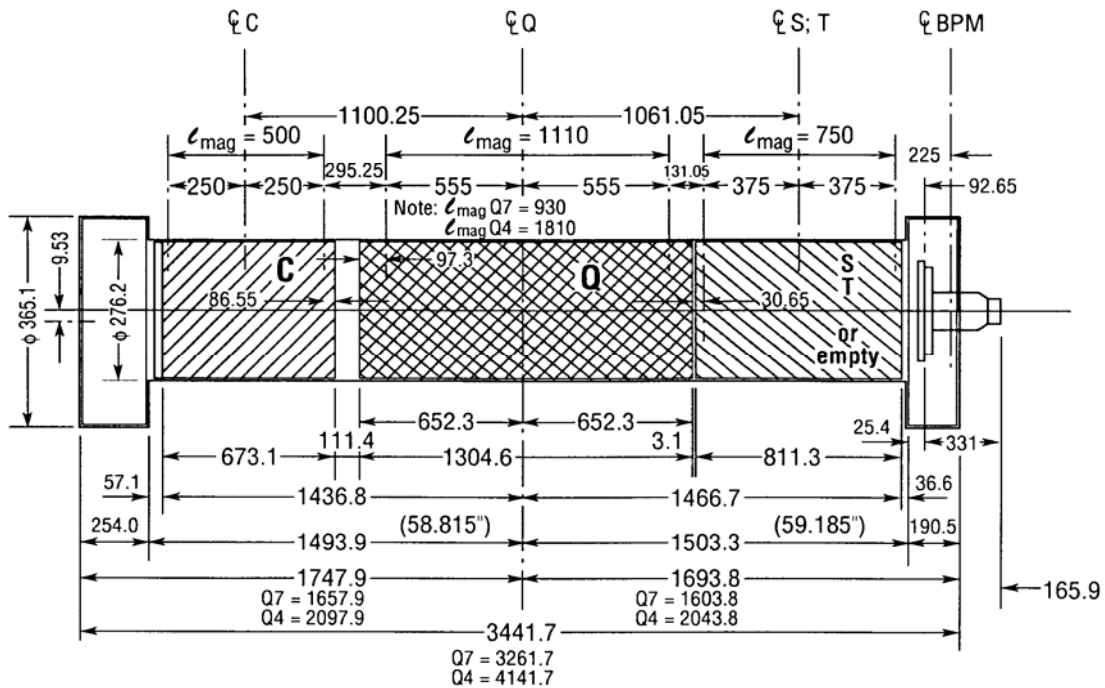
Corrector, quadrupole, sextupole (CQS) assembly. Lamination length is shown (dimensions in mm).
